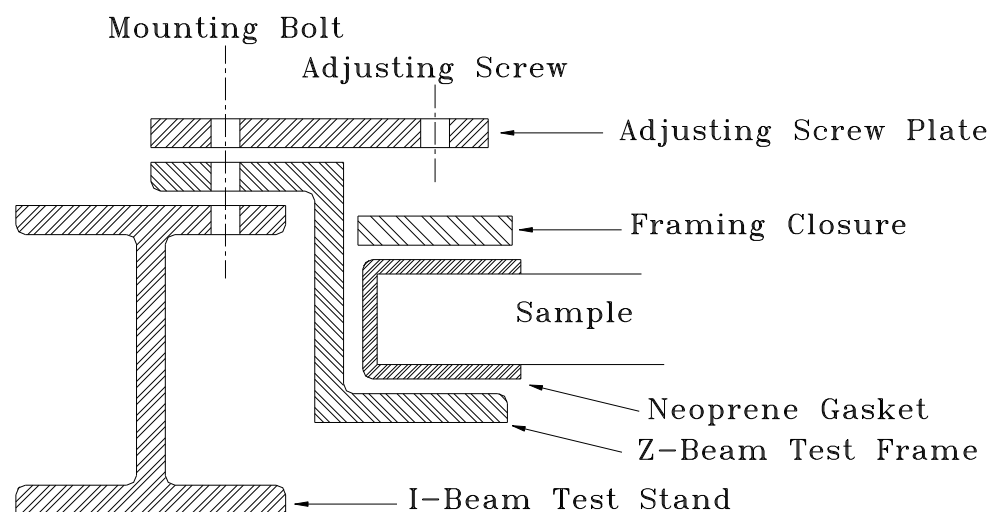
FRAMING AND FIXTURING OF TEST SAMPLE
